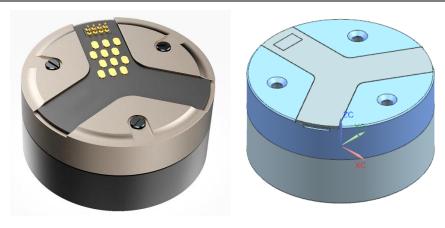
Outline drawing of BS-FU40-300-D1ES micro-nano fiber optic gyroscope
